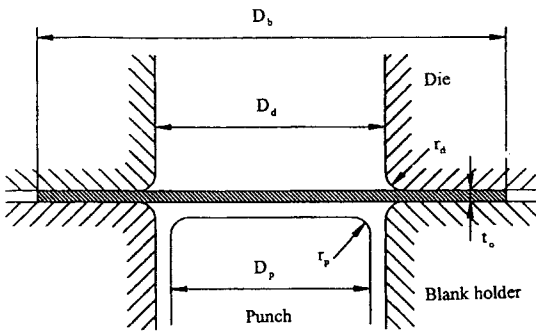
Schematic view of geometric description for cylindrical cup deep drawing
